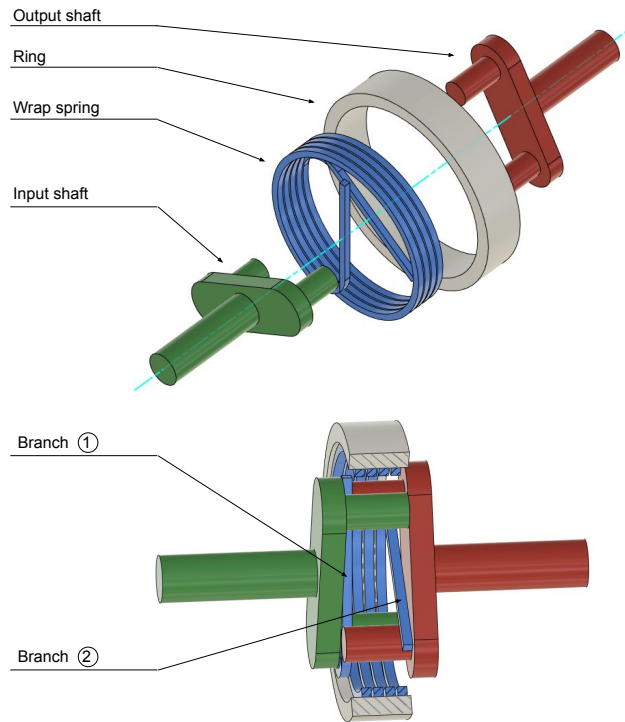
Principle of the proposed mechanism, composed of three rotating parts (input shaft, output shaft, and spring) and the ring fixed to the chassis
